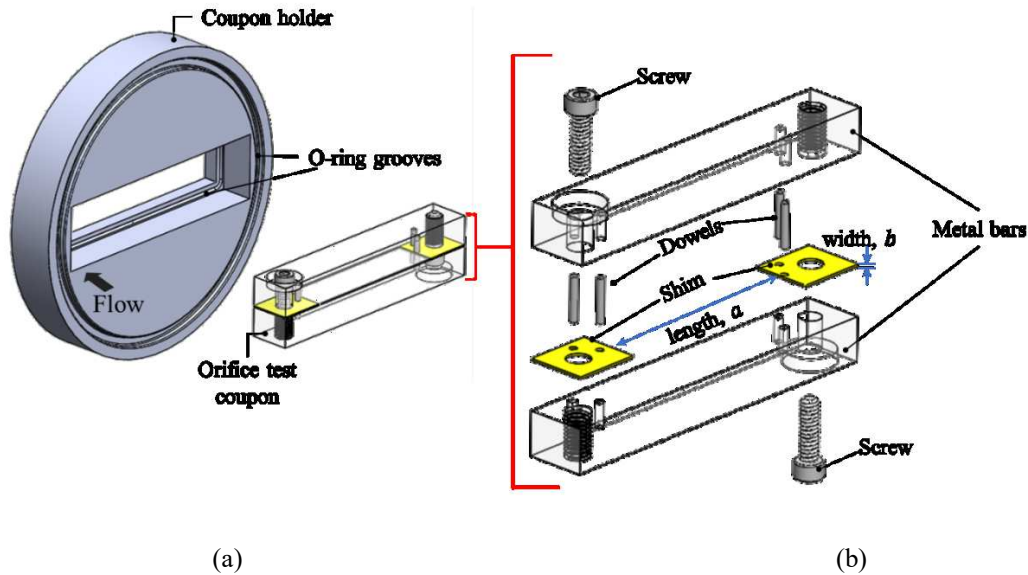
Exploded views of the solid models showing the components in (a) method used to install the test coupons in the pipe, and (b) the shim-based approach devised to manufacturing test coupons of varying AR
